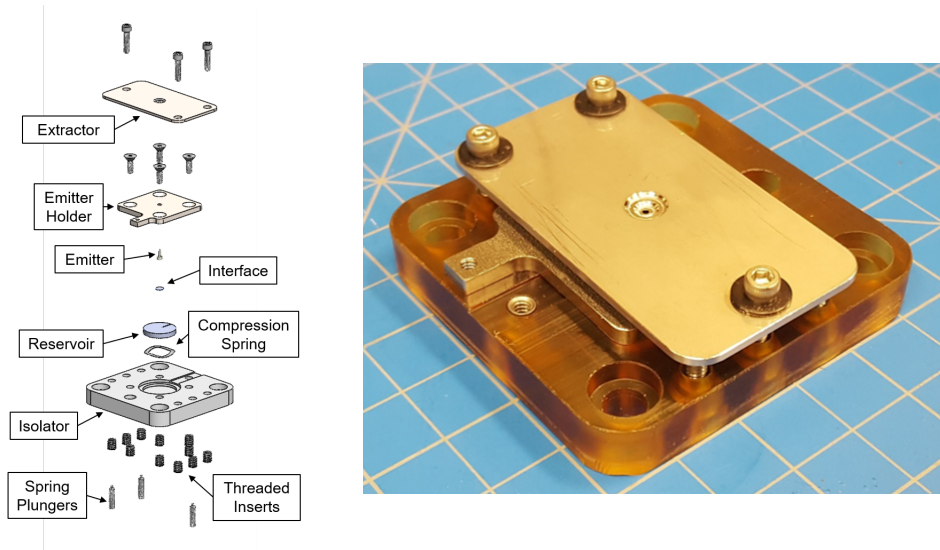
Left, an exploded view of the thruster design. Right, thruster as fabricated and assembled.
